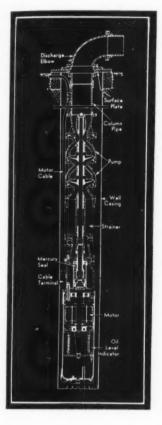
This unusually compact deep well pumping unit has its turbines located above a submerged driving motor. Supported at the lower end of the discharge pipe, the only other surface connections required are the power cable and an oil tube - the short drive shaft being self-contained with-
